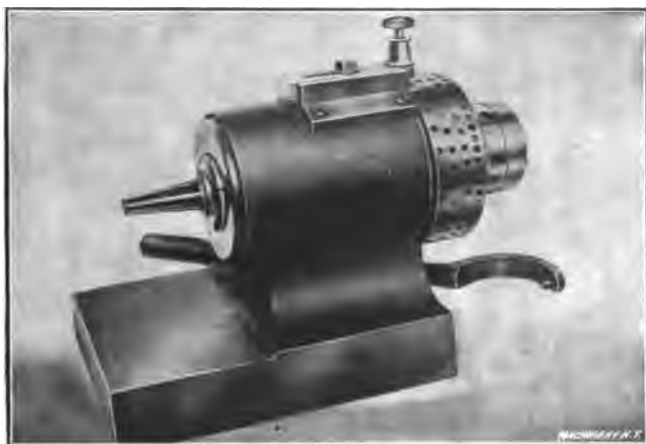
Fixture for Fluting Cutters, used on the Die-sinking Machine
